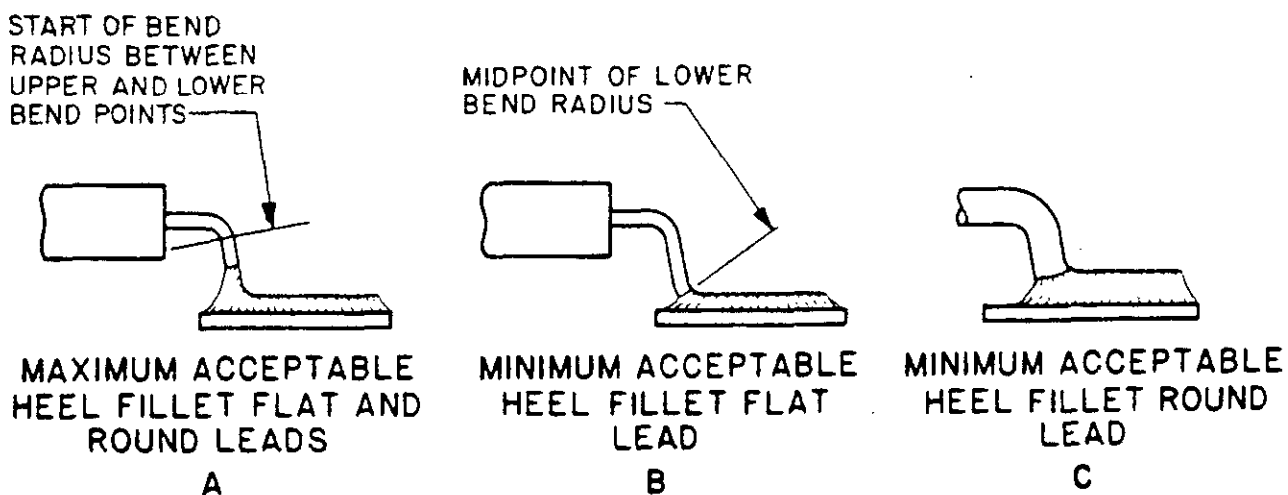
Planar mounted device lead heel fillet (see 5.7.12).
